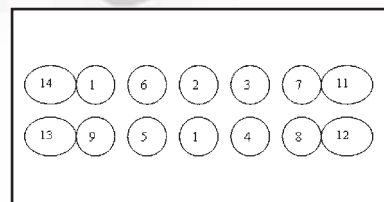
Main bearing torque sequence for Cummins ISX 600 engines.
